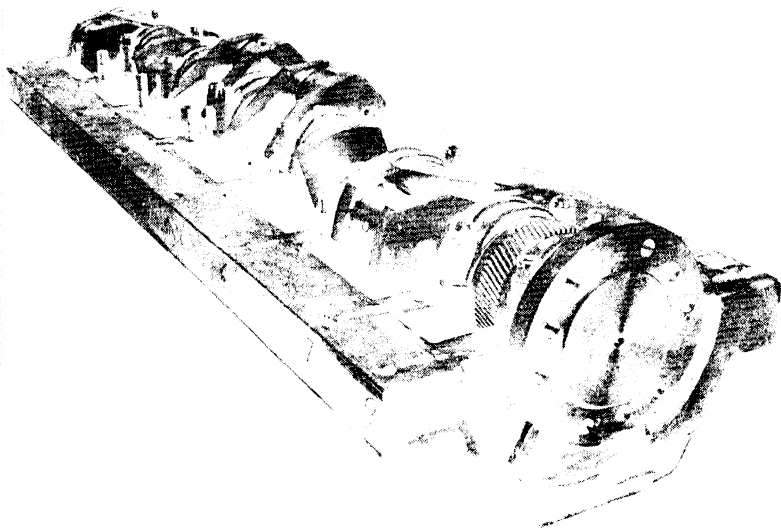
This crankshaft and engine bed (Hendy Series 50) has a welded steel base designed for rigidity and heavy cross members to support the main bearings and keep the shaft in perfect alignment.
